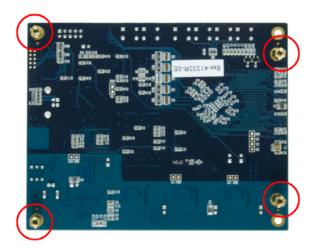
The back side view of the Cyclone III FPGA starter board after 4 female standoffs are screwed in position.
